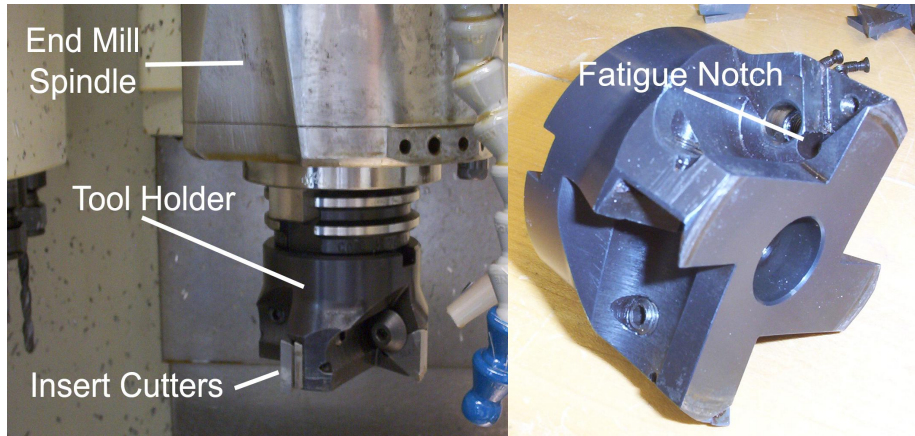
A & 4B. SPINDLE AND SENSOR LOCATION
